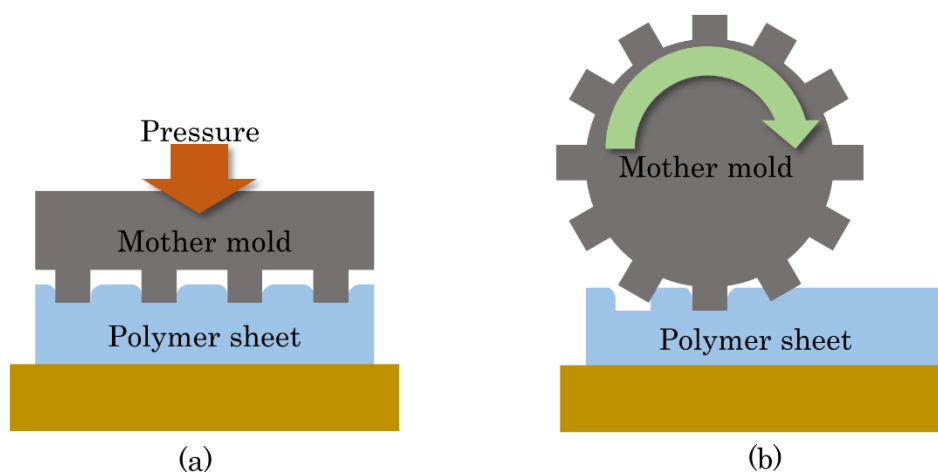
11 Schematic illustration of the hot embossing process. (a) plate-to-plate. (b) roll-to-plate.
